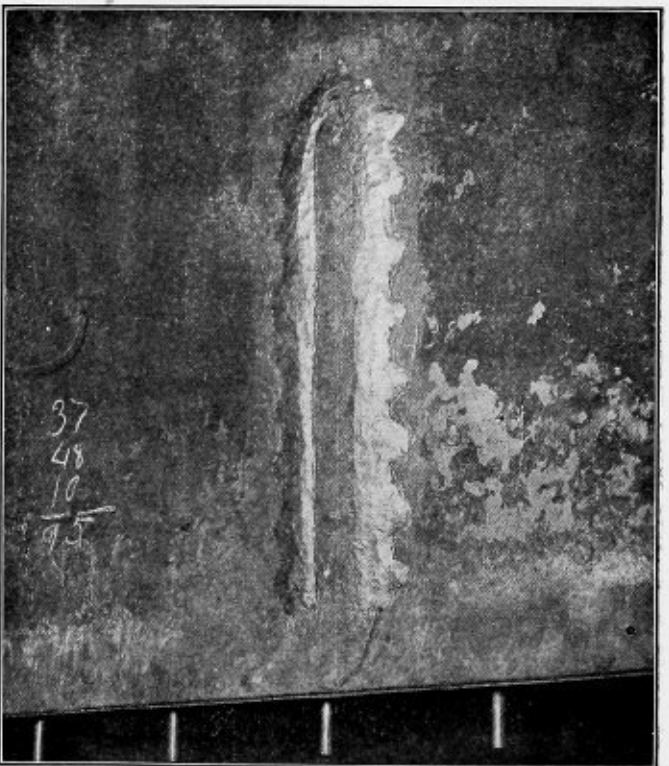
SIDE SHEET PATCH WELDED TO FIRE-BOX
